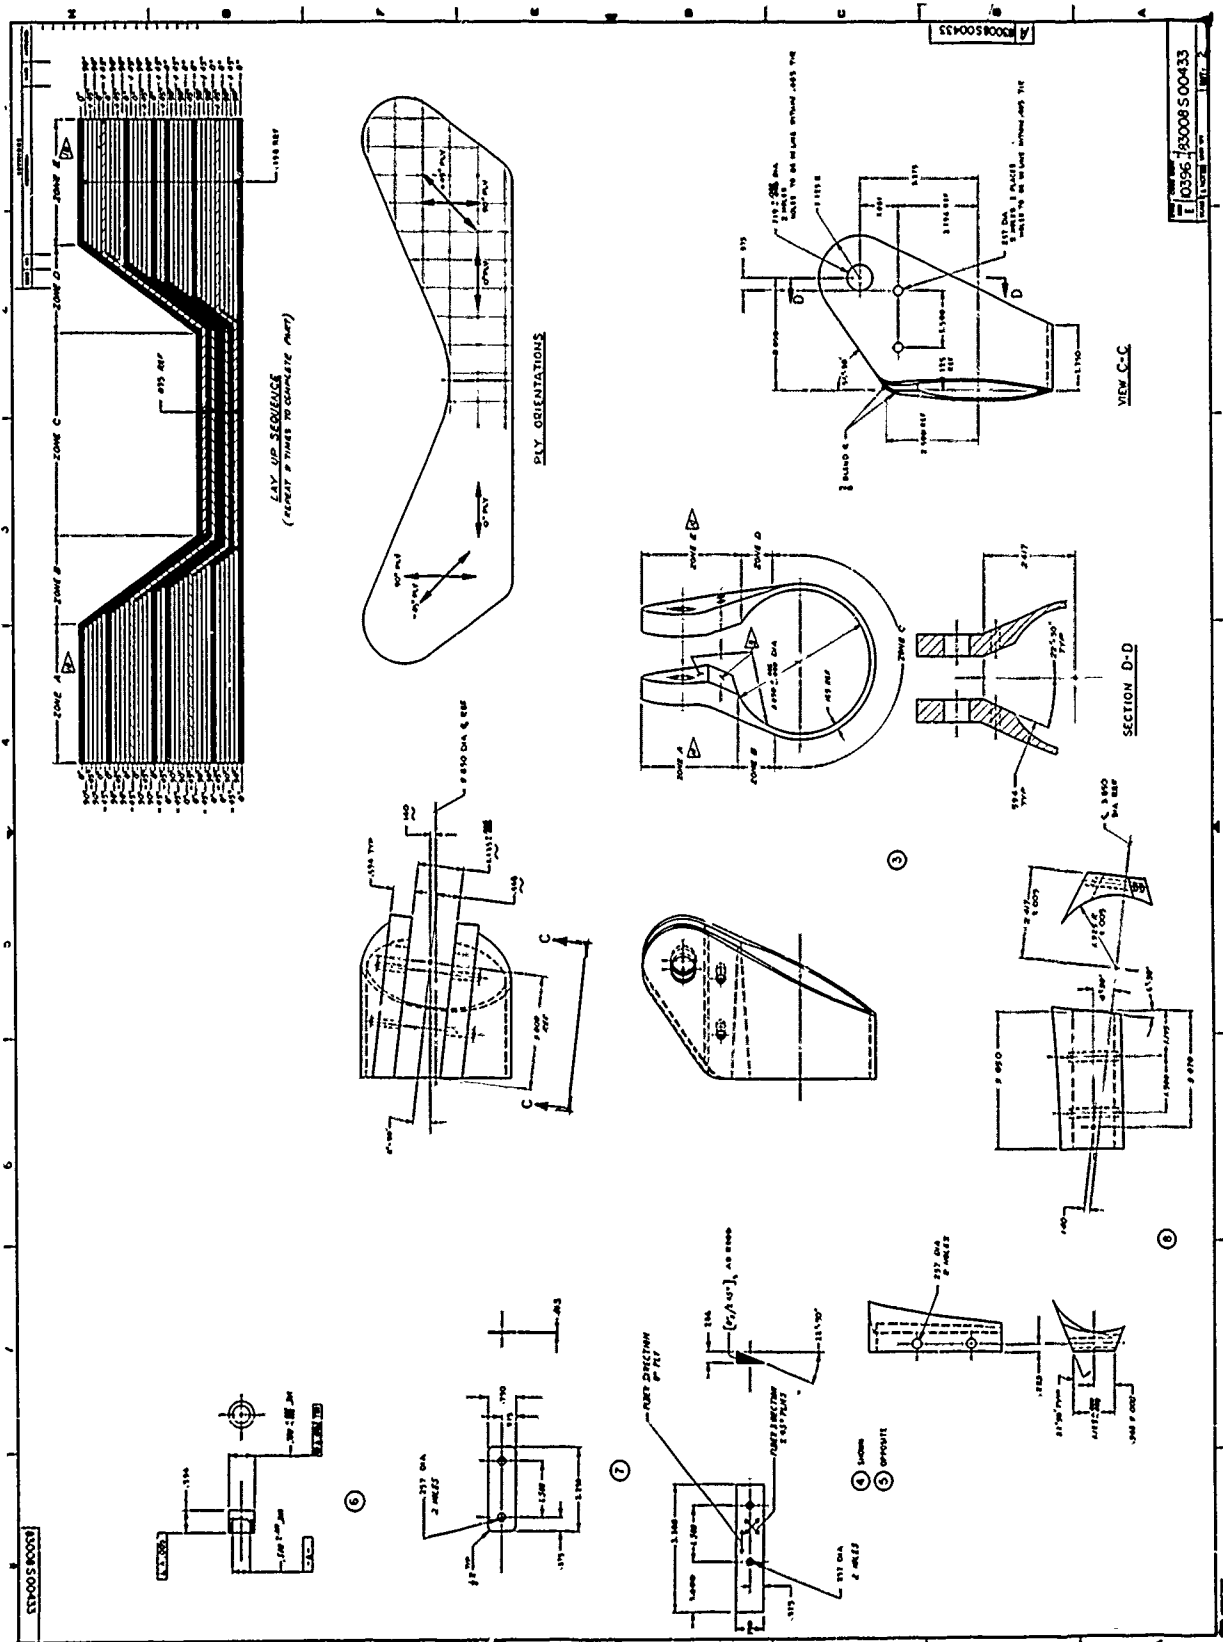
Side Brace Attachment, Drawing 83008S00433, Sheet 2 of 2
